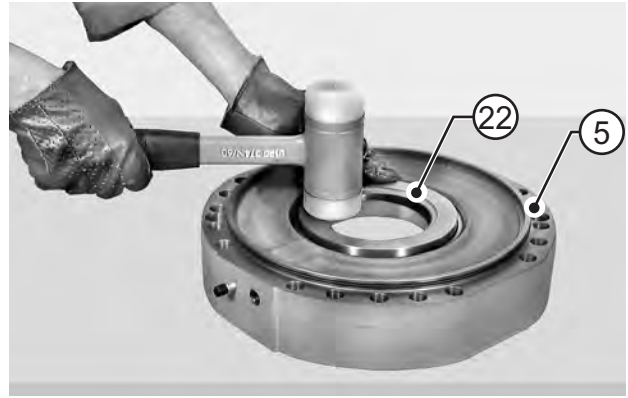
ASSEMBLING THE BRAKE PISTON
